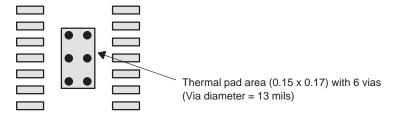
PowerPAD PCB Etch and Via Pattern - Minimum Requirements
